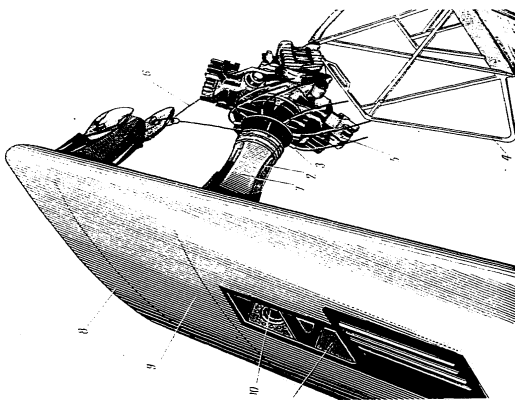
LIFTING TAIL ROTOR HUB BY SLINGS
